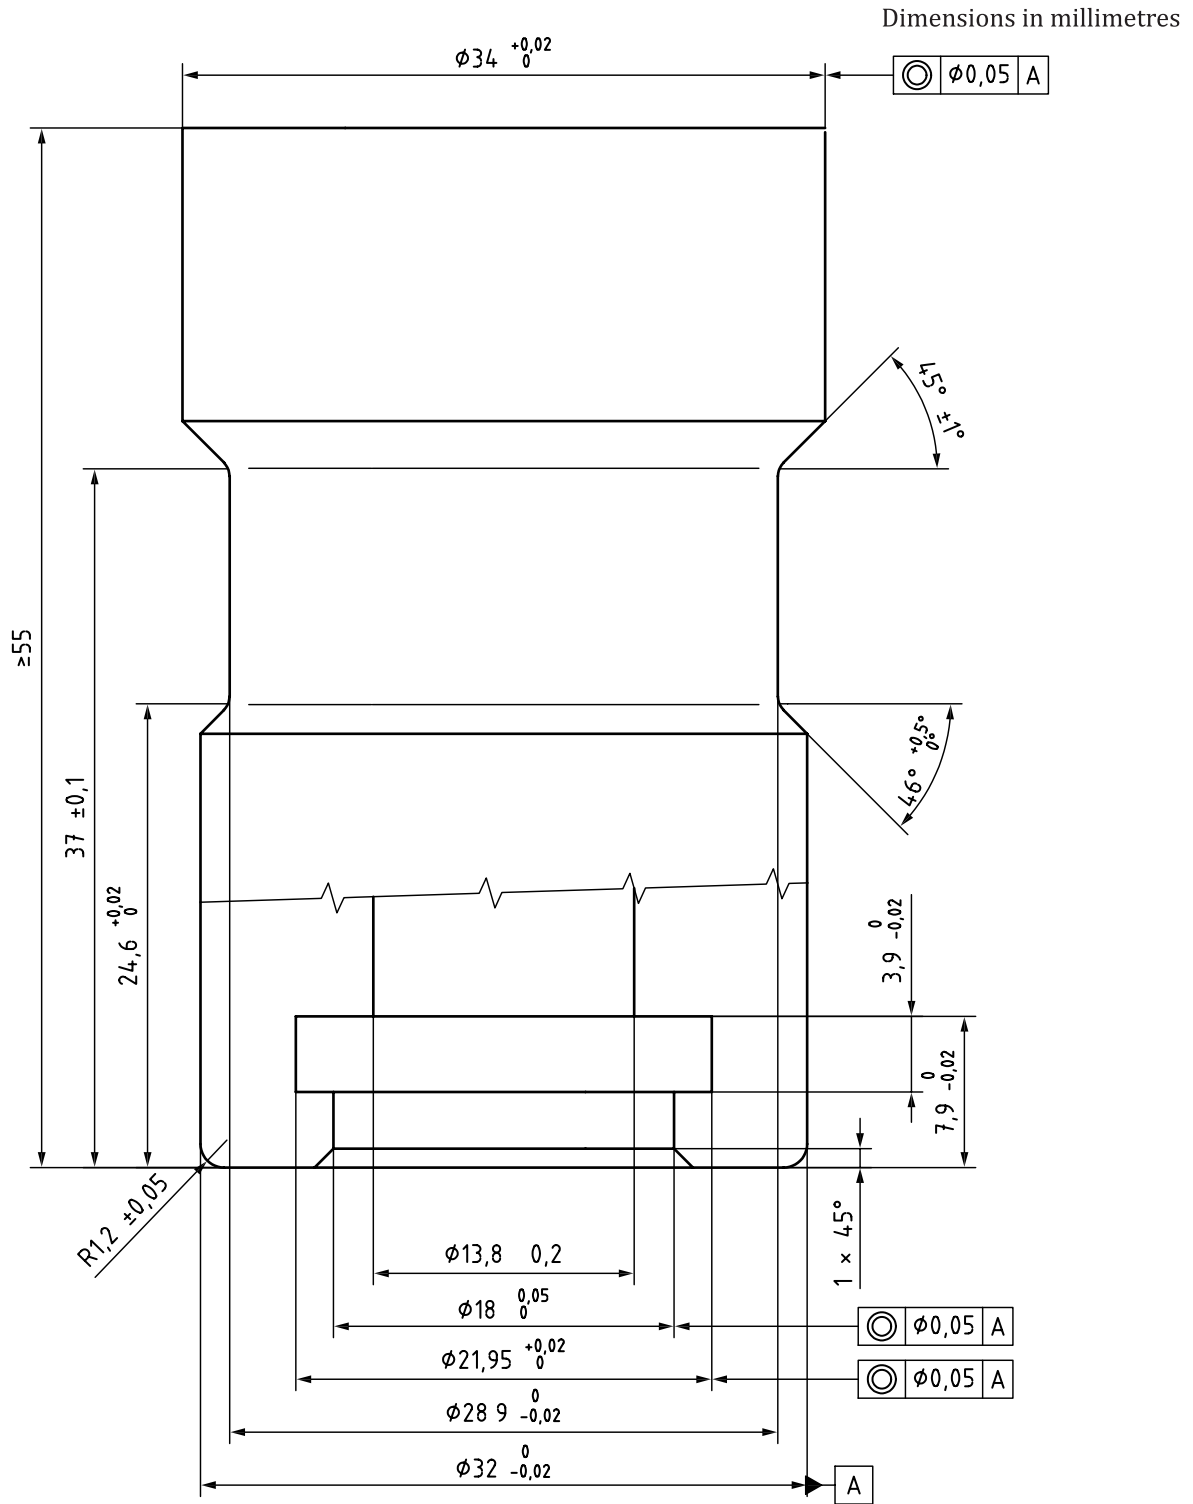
C250 - "Tight fit" tolerances
